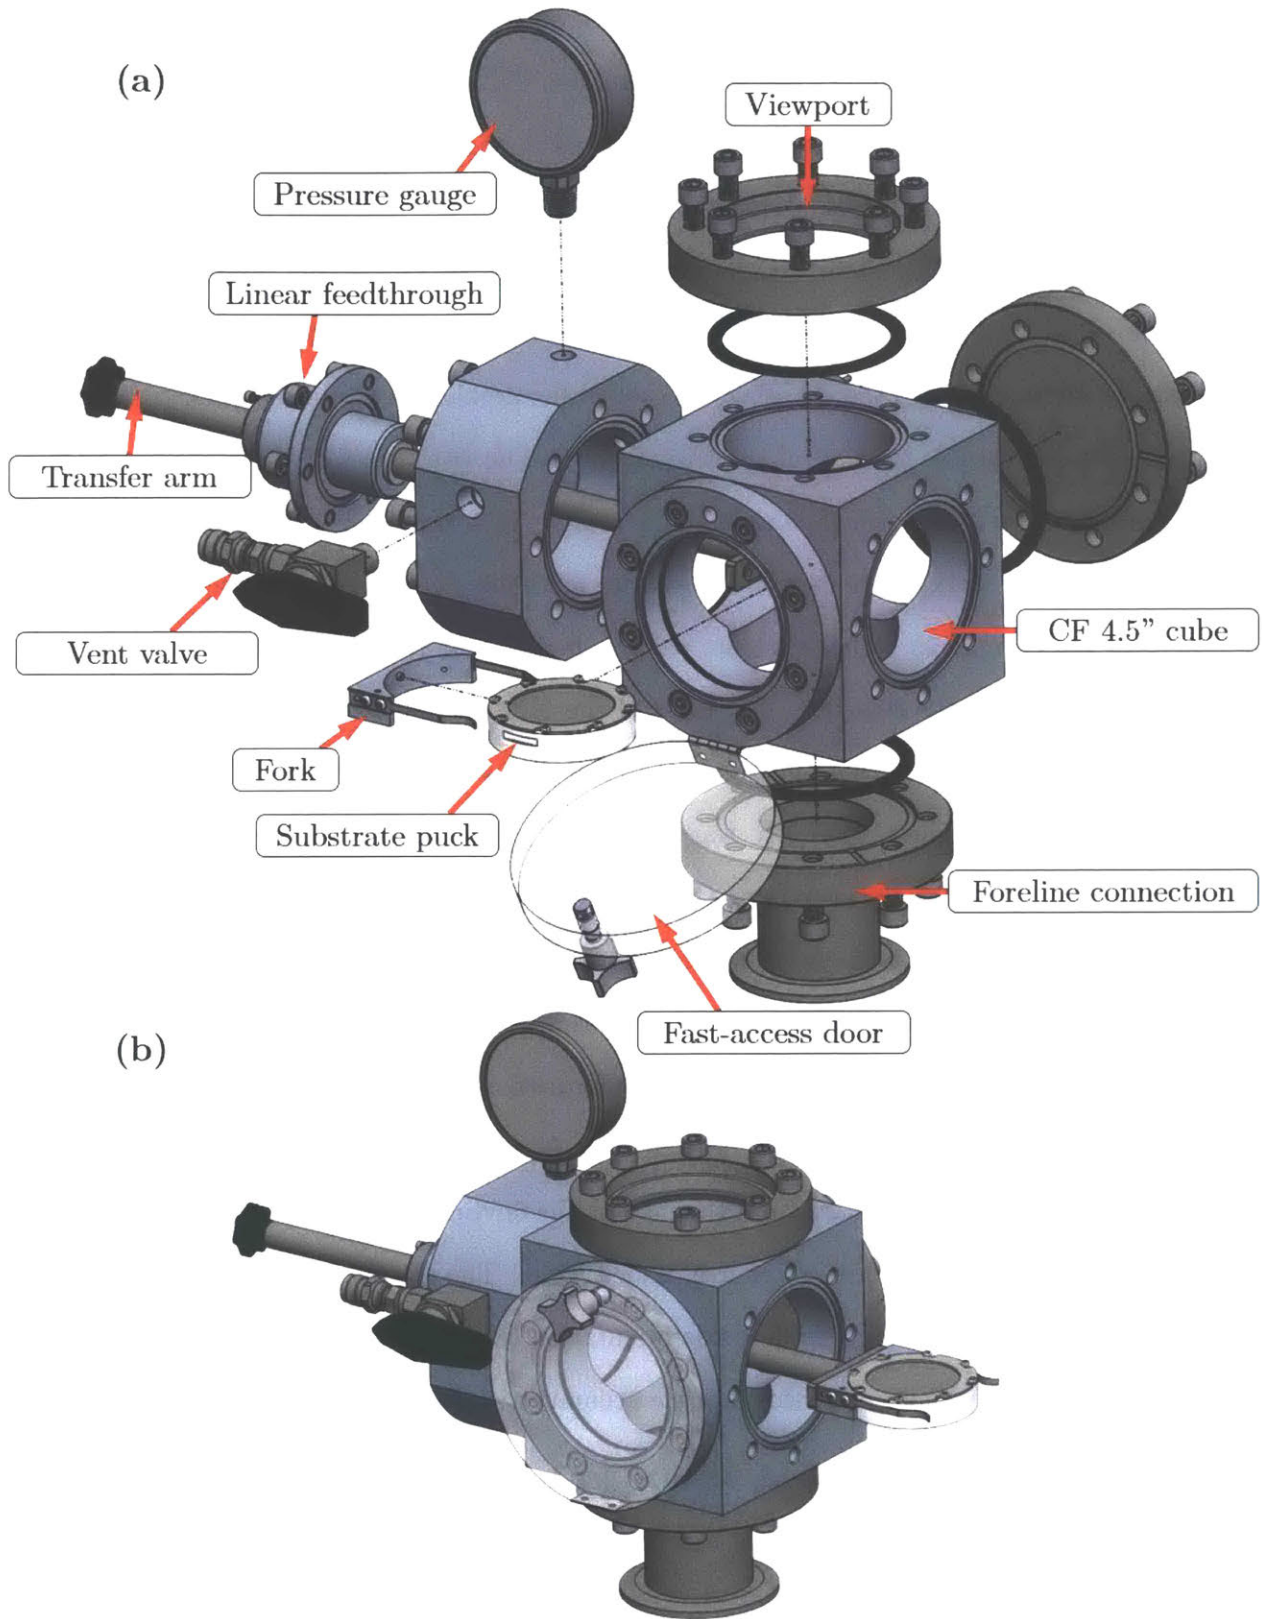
Renderings of the LLA. (a) Exploded and labeled view of LLA components; (b) Assembled LLA view with wafer transfer arm extended.
